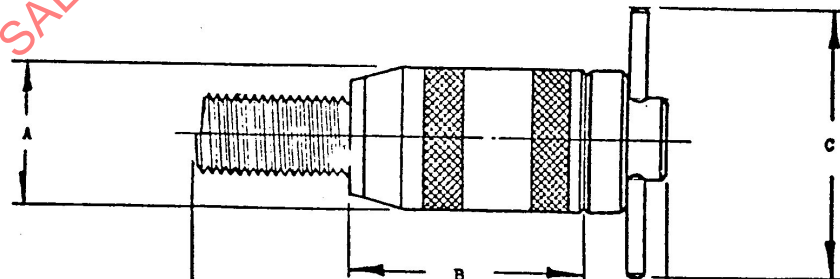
Type III, Class 1, Style b prewinder inserting tool for 9/16 (0.5625) through 1-1/2 (1.500) unified fine series
